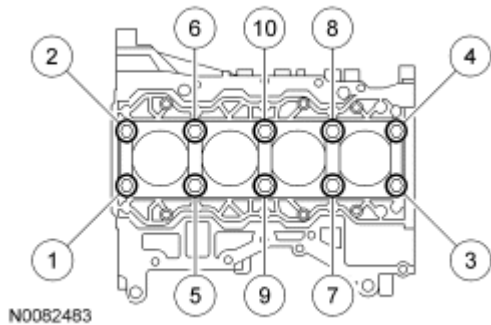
Identifying Crankshaft Cap Bolts Removing Sequence
